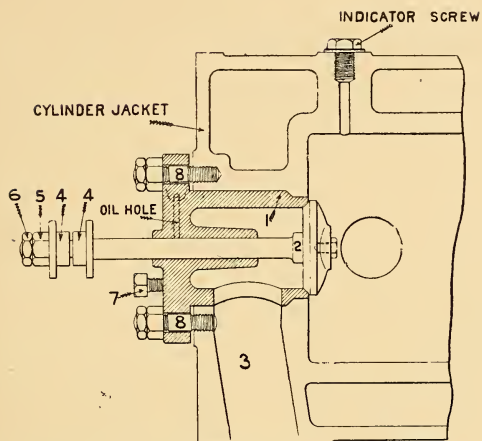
Section through exhaust valve and plug of Campbell Oil Engine.
